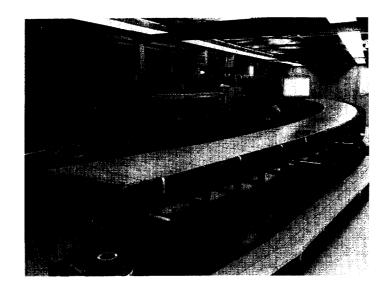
54-Ft. Inner Vacuum Chamber in Final Assembly Fixture.
